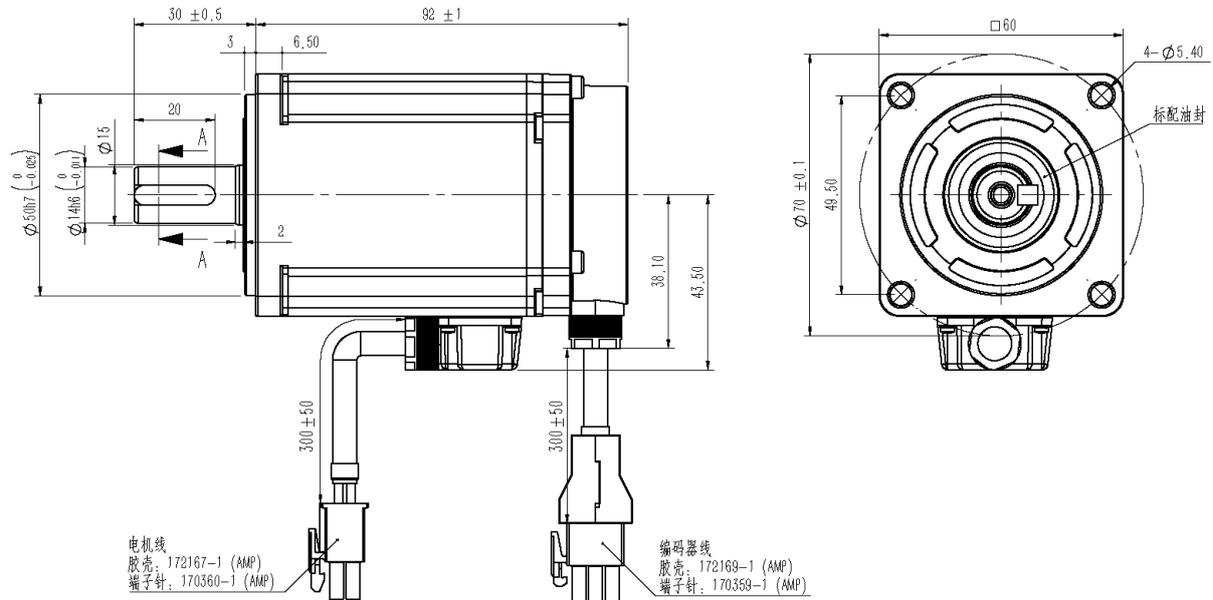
400W servo motor (without holding brake) external dimension drawing
